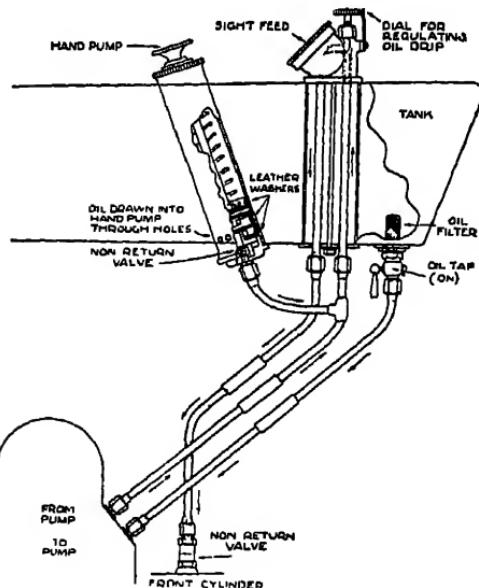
DOUGLAS DRIP-FEED LUBRICATION SYSTEM
